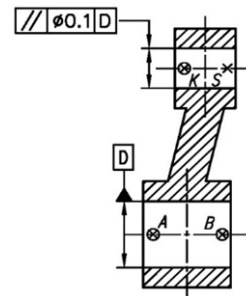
Example of specification with characteristic points of parallelism of axes with cylindrical tolerance zone
